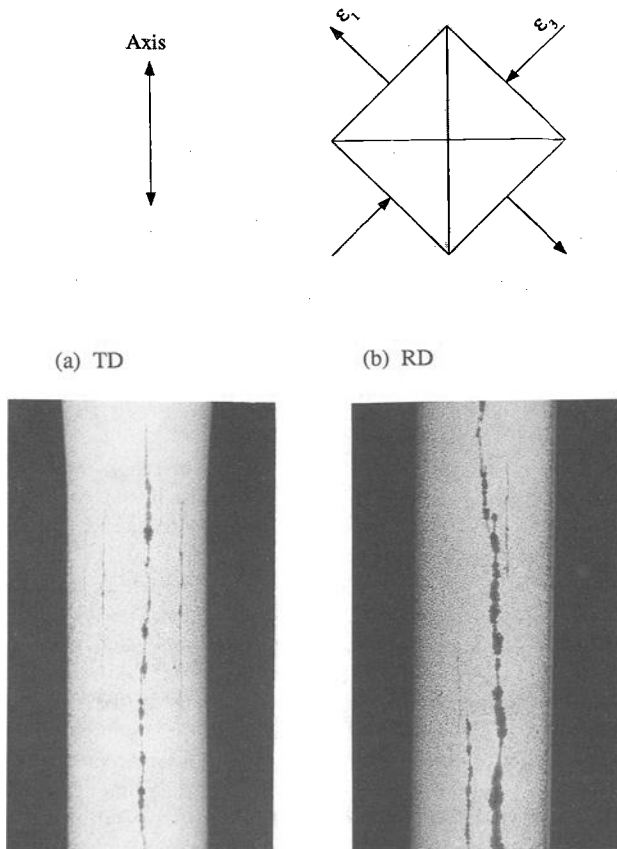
Photographs showing the cracks, their orientations, and the planes of maximum shear on the specimen surface under pure torsion: (a) a TD specimen, and (b) an RD specimen.
